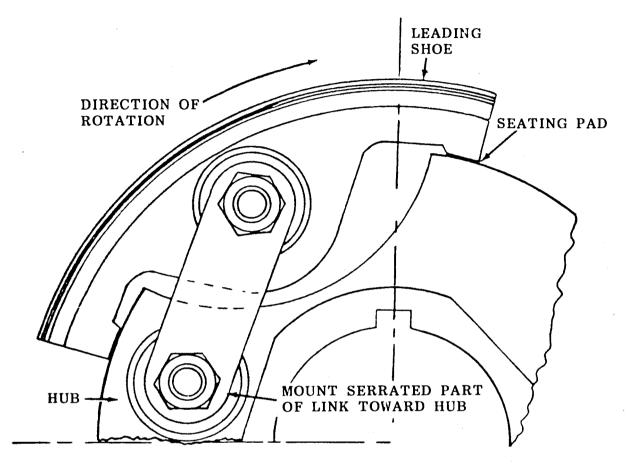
Clutch Assembly, Removal, Disassembly, Reassembly and Installation.
